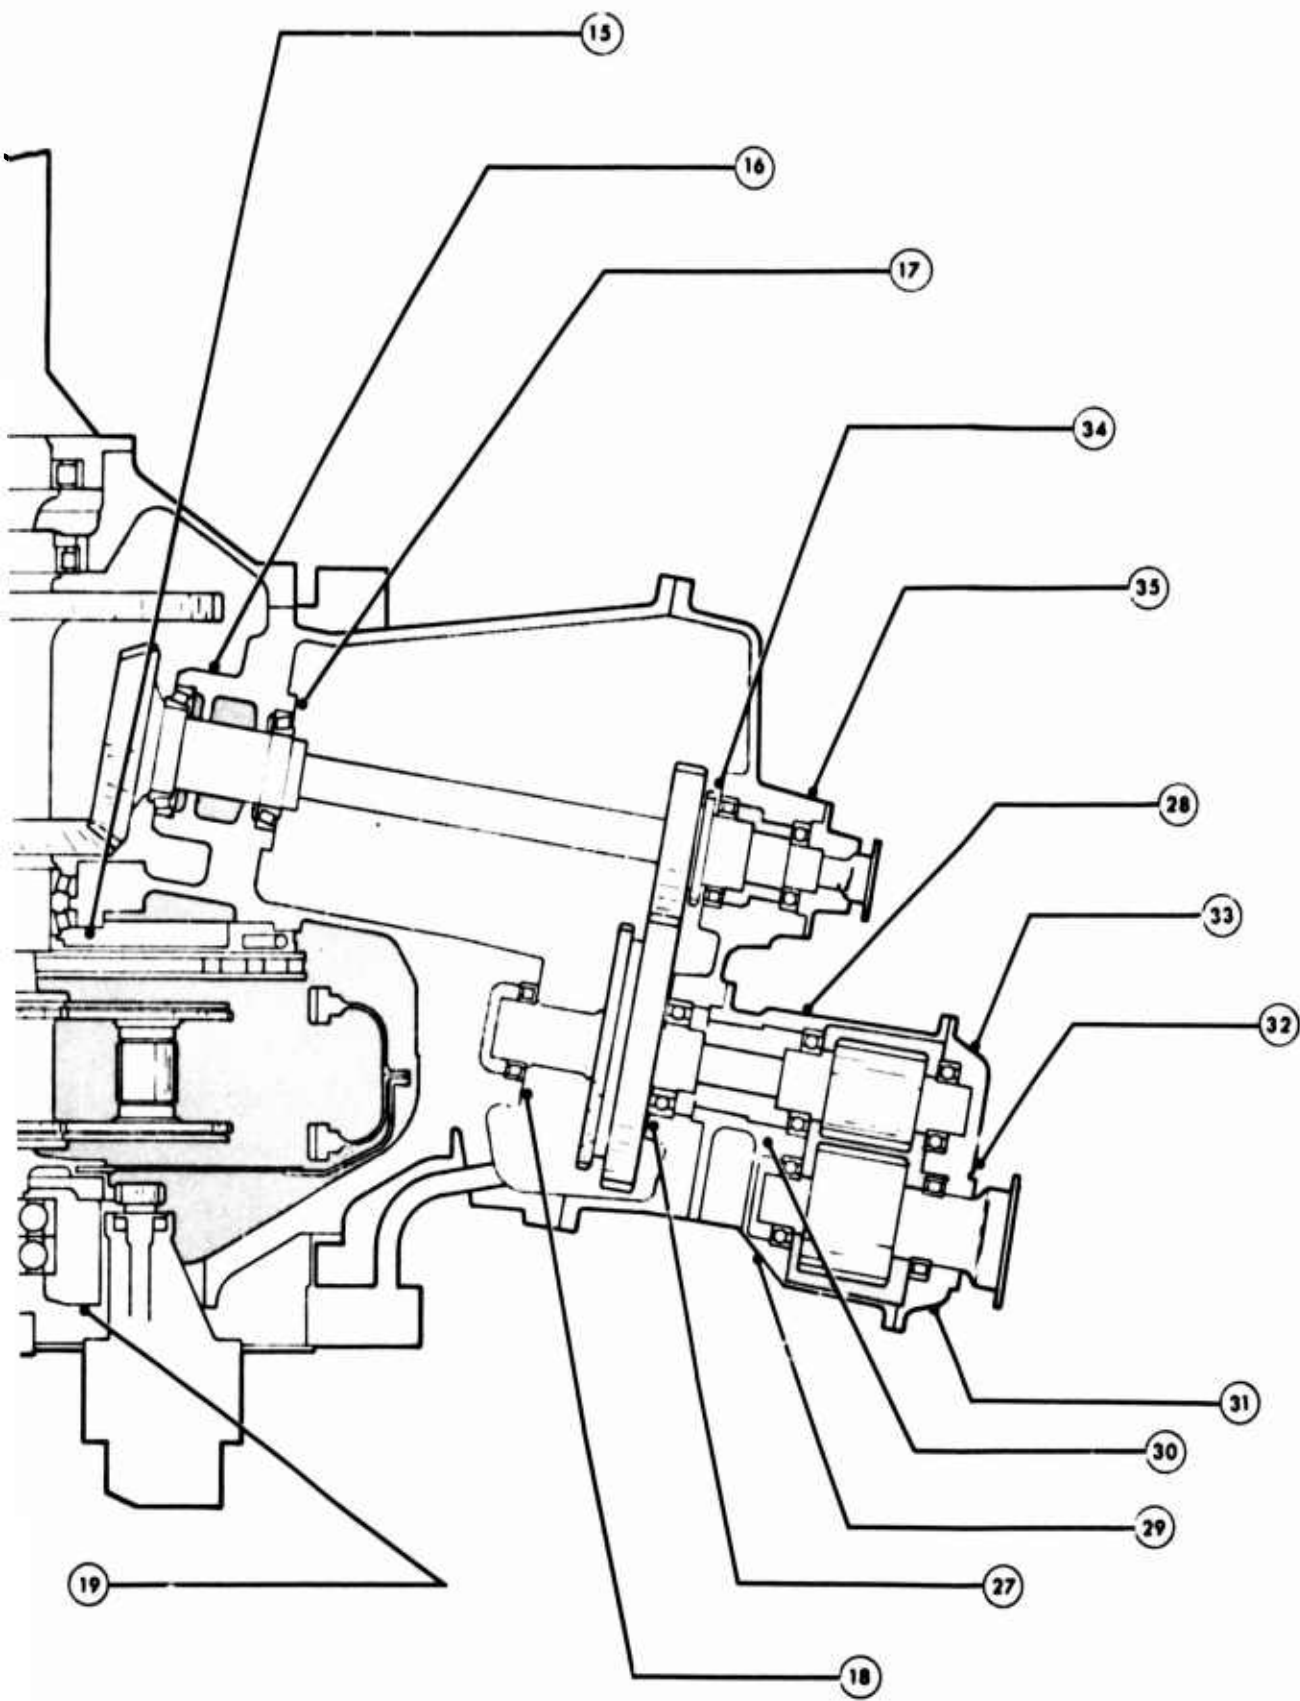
Thermocouple Locations - Roller Gear Transmission.
